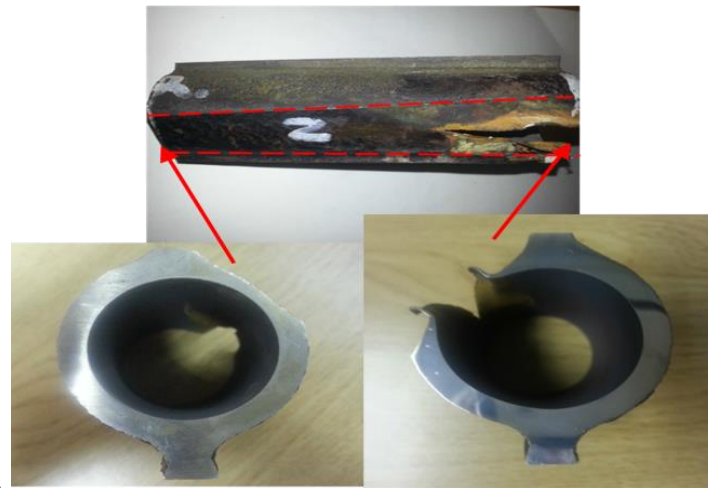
Soot blower erosion of boiler tubes showing localized thinning [24].
